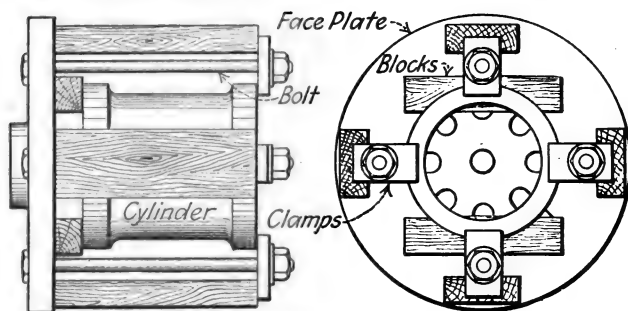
How a cylinder to be bored is mounted on the face-plate.
